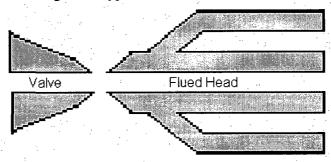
Typical Pipe to Valve Weld Configuration
